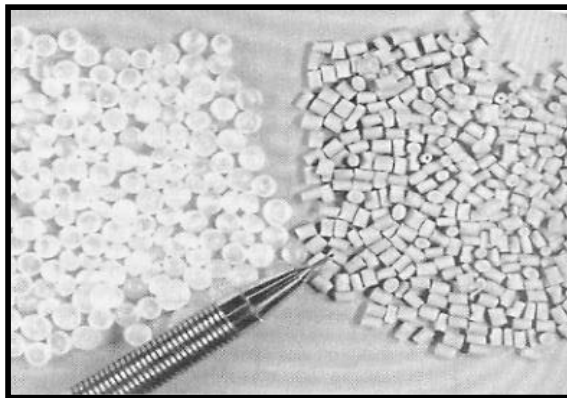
Polypropylene pellets (left) and extruded pellets of pp and fiber mixture (right) prior to injection molding.
